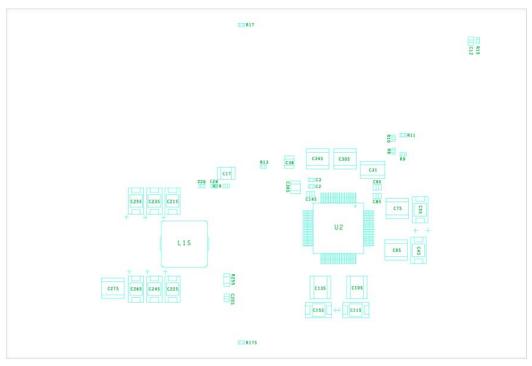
BOTTOM LAYER COMPONENT PLACEMENT
